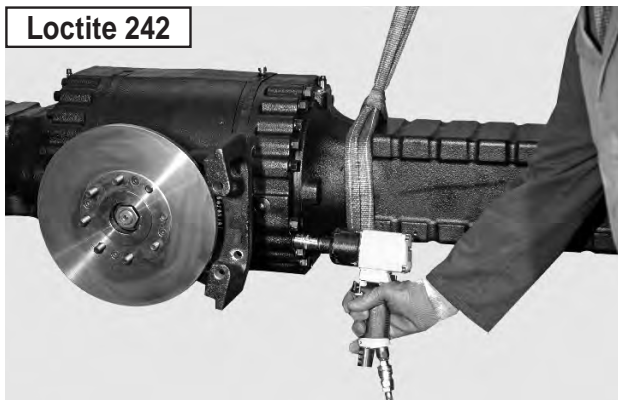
Temporarily lock the arm with nuts previously coated with Loctite 242; tighten lightly to make the unit touch the main body.
